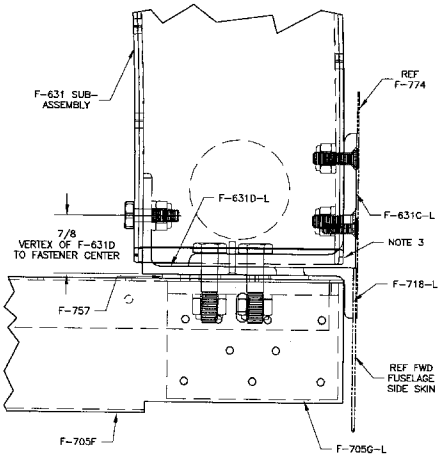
DETAIL A CABIN FRAME ATTACH EXPLODED VIEW FUSELAGE SKINS OMITTED FOR CLARITY
